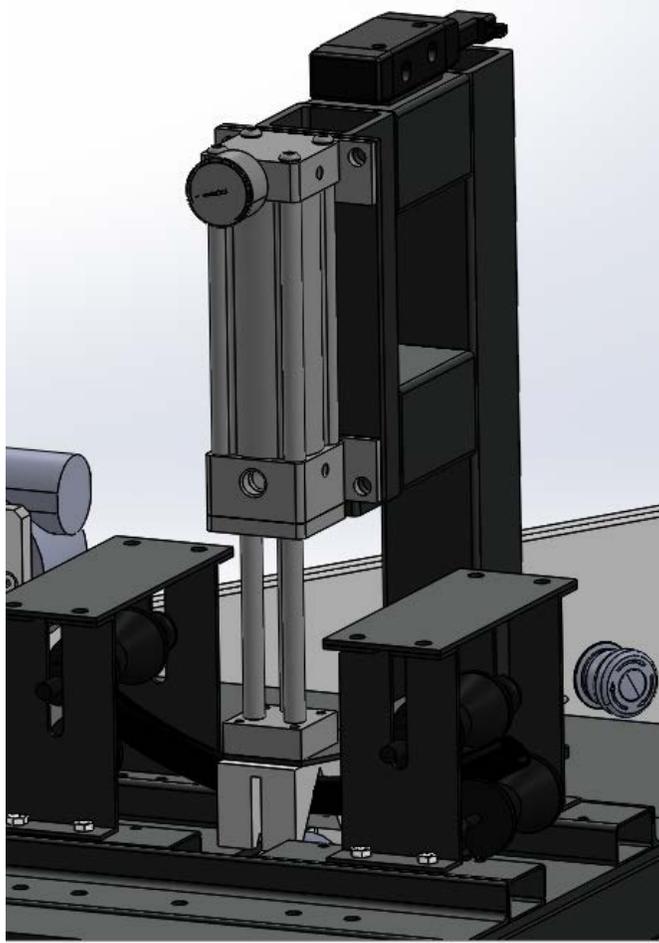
Pneumatic Design for Cutting System– done with Solid Works
